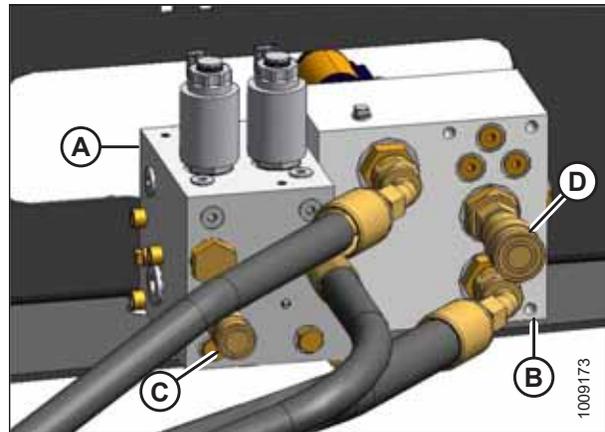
Manifolds without Reverser Valve Configured for Auger Header
